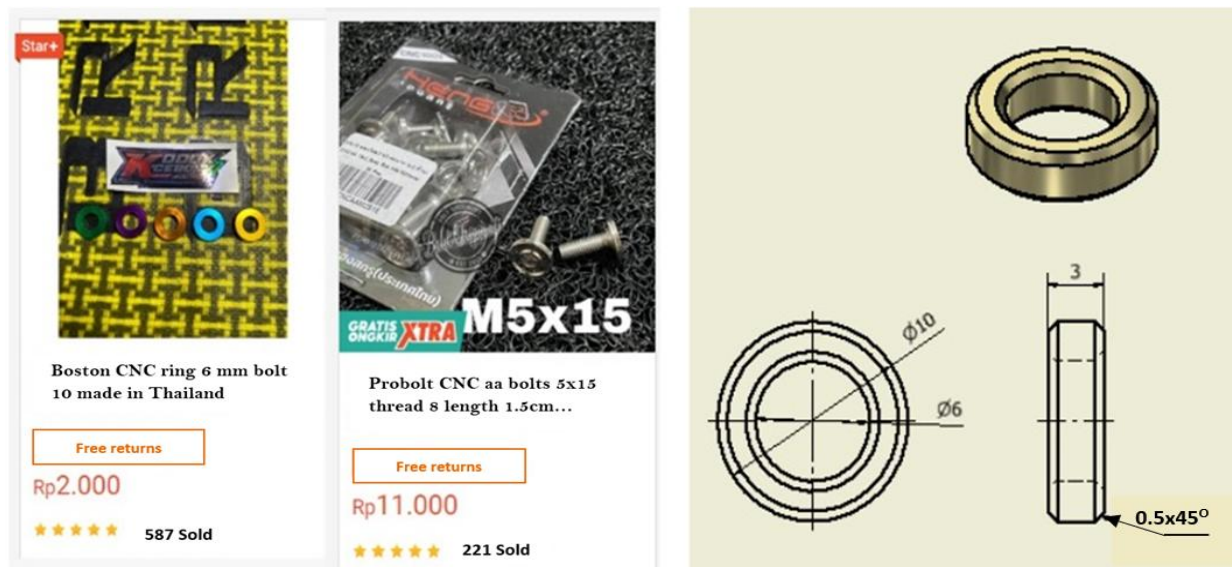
(a) Ring Boston and probolt bolt products using CNC machines on the Indonesian marketplace, (b) ring Boston design using inventor computer aided design (CAD).
